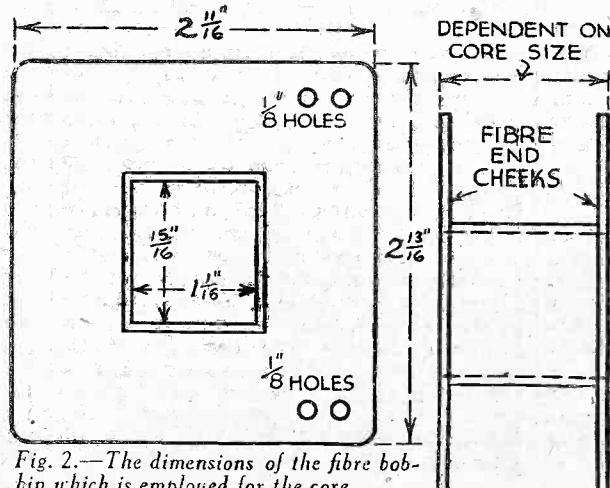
The dimensions of the fibre bobbin which is employed for the core.
